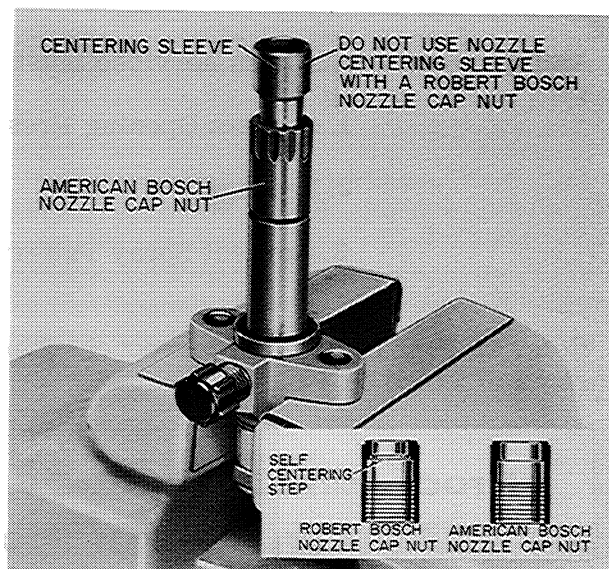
Positioning Nozzle Body with Nozzle Centering Sleeve
